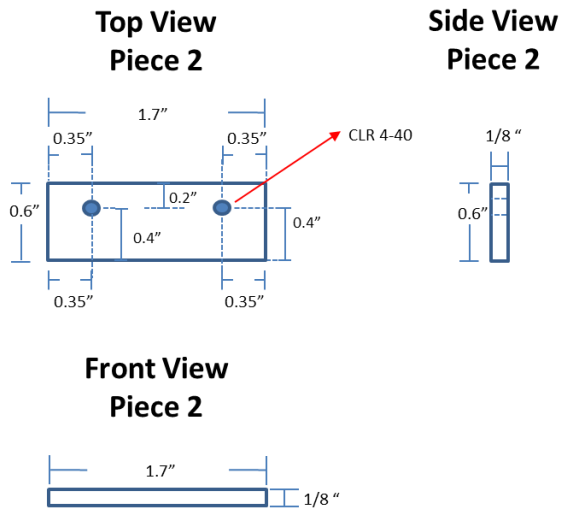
Schematic of piece 2 for motorized stage fixture. Two of piece 2 are required for assembly.
